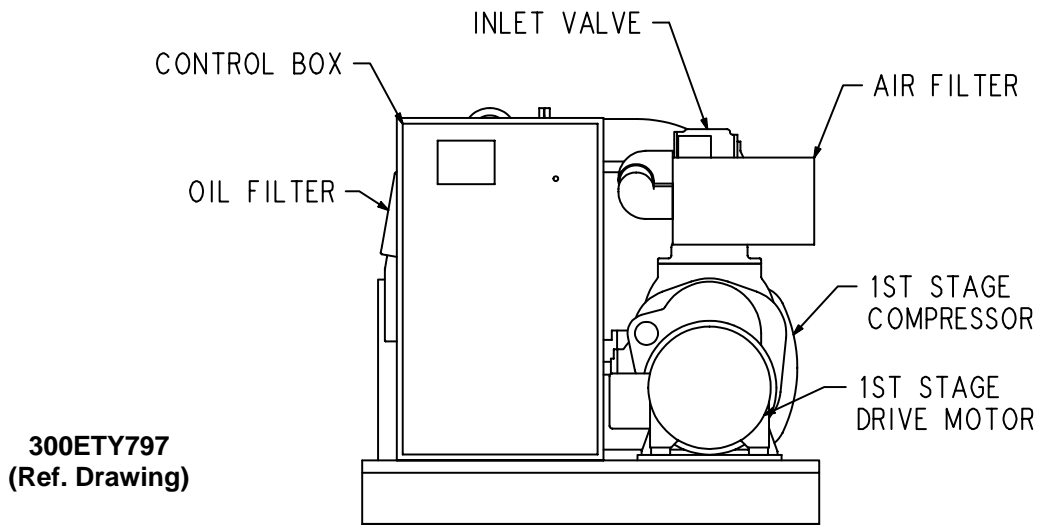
AIR COOLED UNIT – LESS ENCLOSURE – CONTROL BOX END
